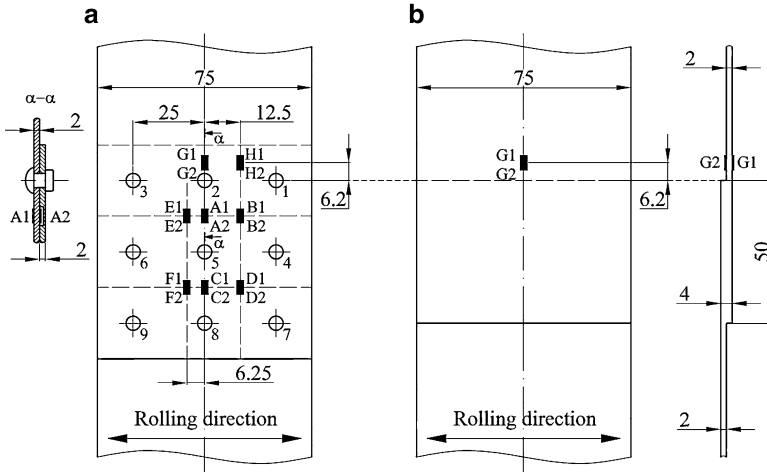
Instrumentation for secondary bending measurements: (a) riveted specimen; (b) dummy specimen (Skorupa et al. 2011)
